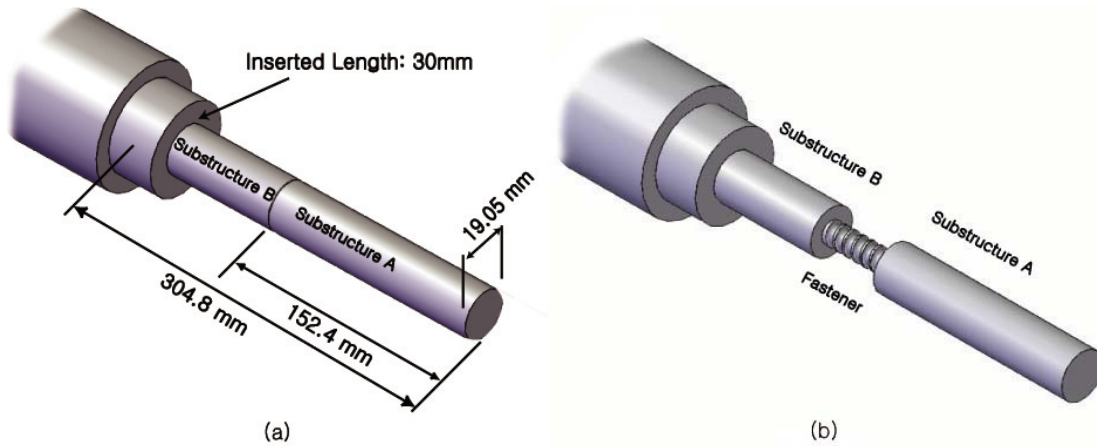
Dimensions and Joint method of the test structures: (a) dimensions of the system, (b) fastener joint
